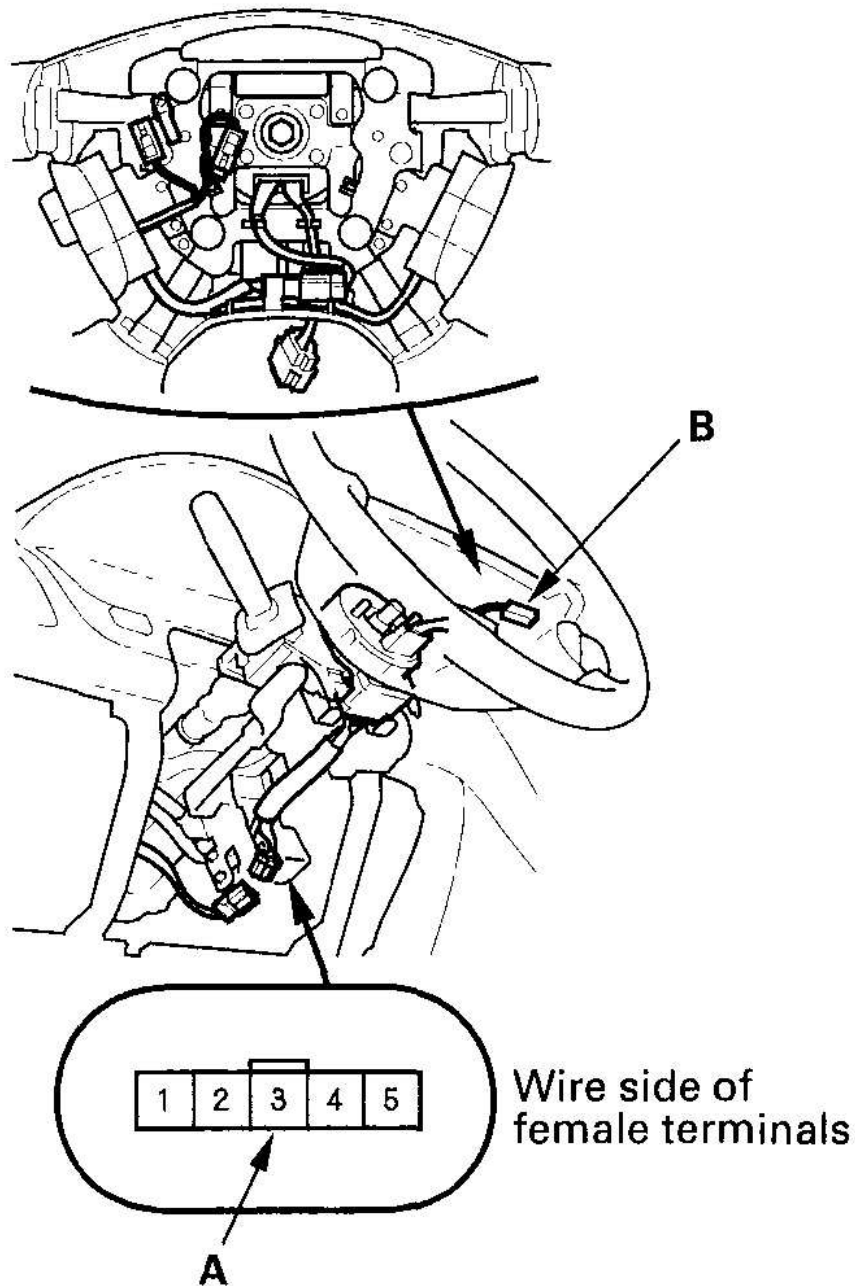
Disconnecting Dashboard Wire Harness B 5P Connector From Cable Reel
